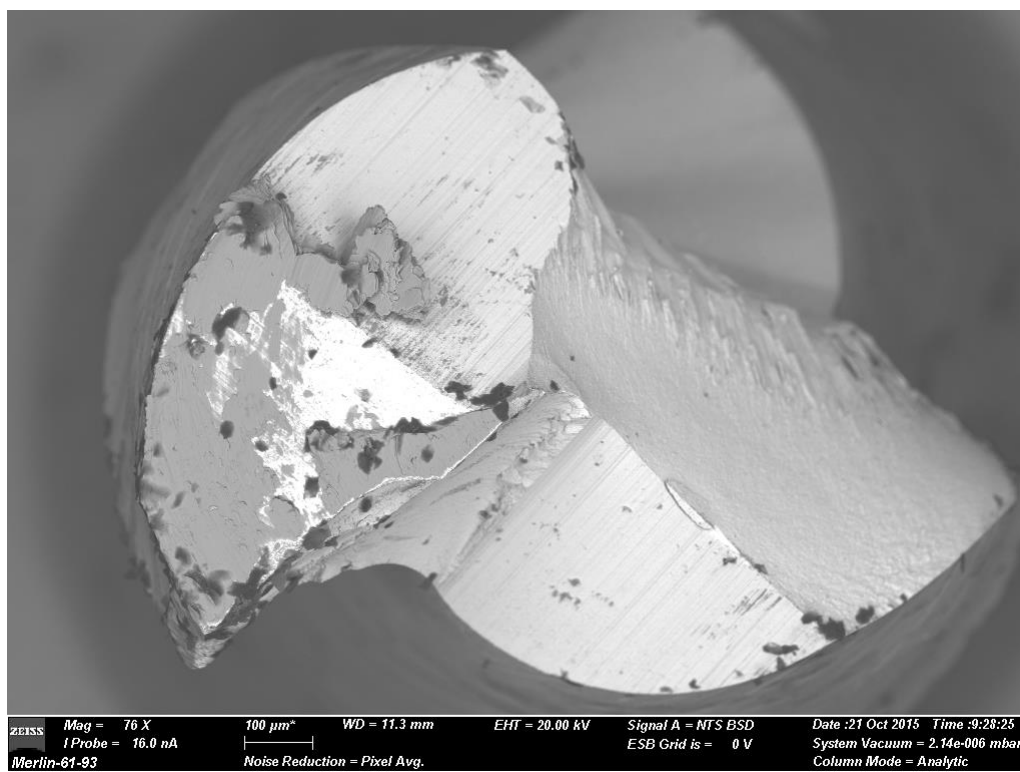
Experimental run 19: Tungsten carbide tool after machining with parameters $v_c=75.4$ [m/min], $v_f=768$ [mm/min] and $a_p=125$ [μm]
